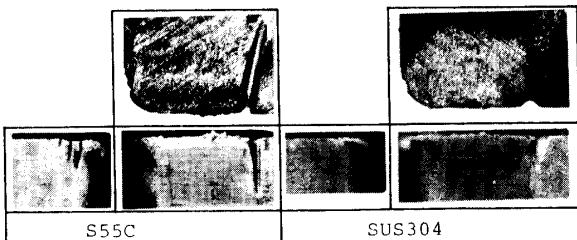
Tool wear and cutting force in cutting with tool of positive rake angle
